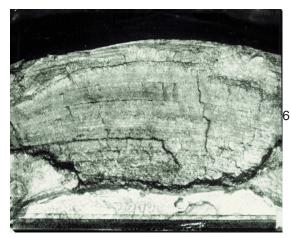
Seaward left inner weld stub axle - beach marks
